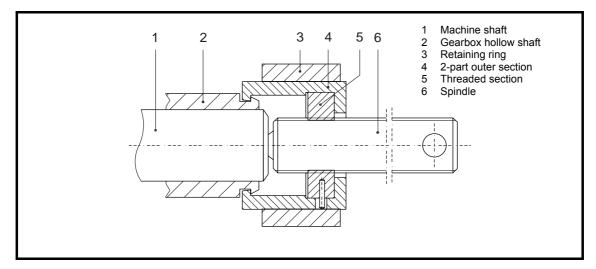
Principle sketch: Mounting with a thread bolt – Dimensions see next page (The scope of delivery does not include the threaded pin and thrust washer)
